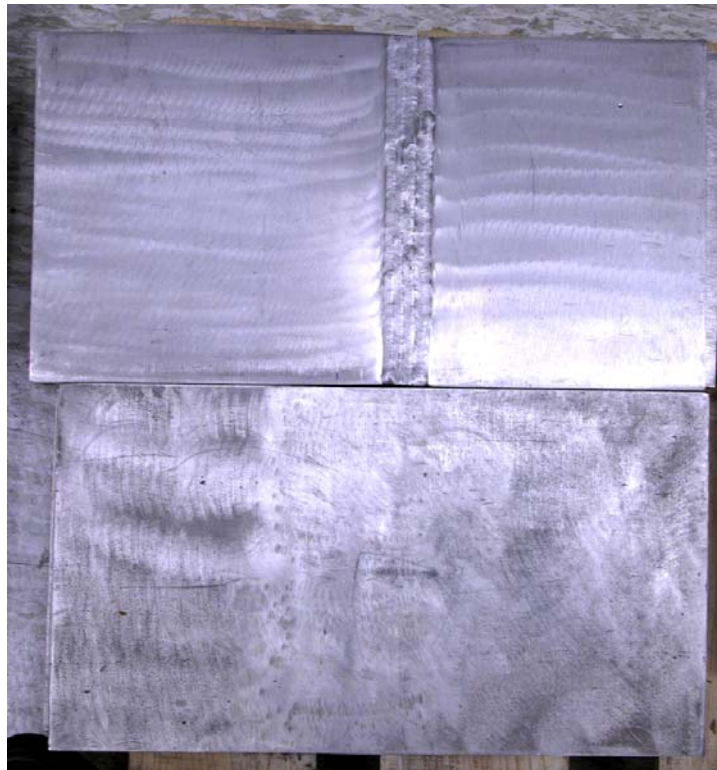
Reactor Internals Samples Used in Testing. Top shows weld crown present; bottom shows weld crown removed.
